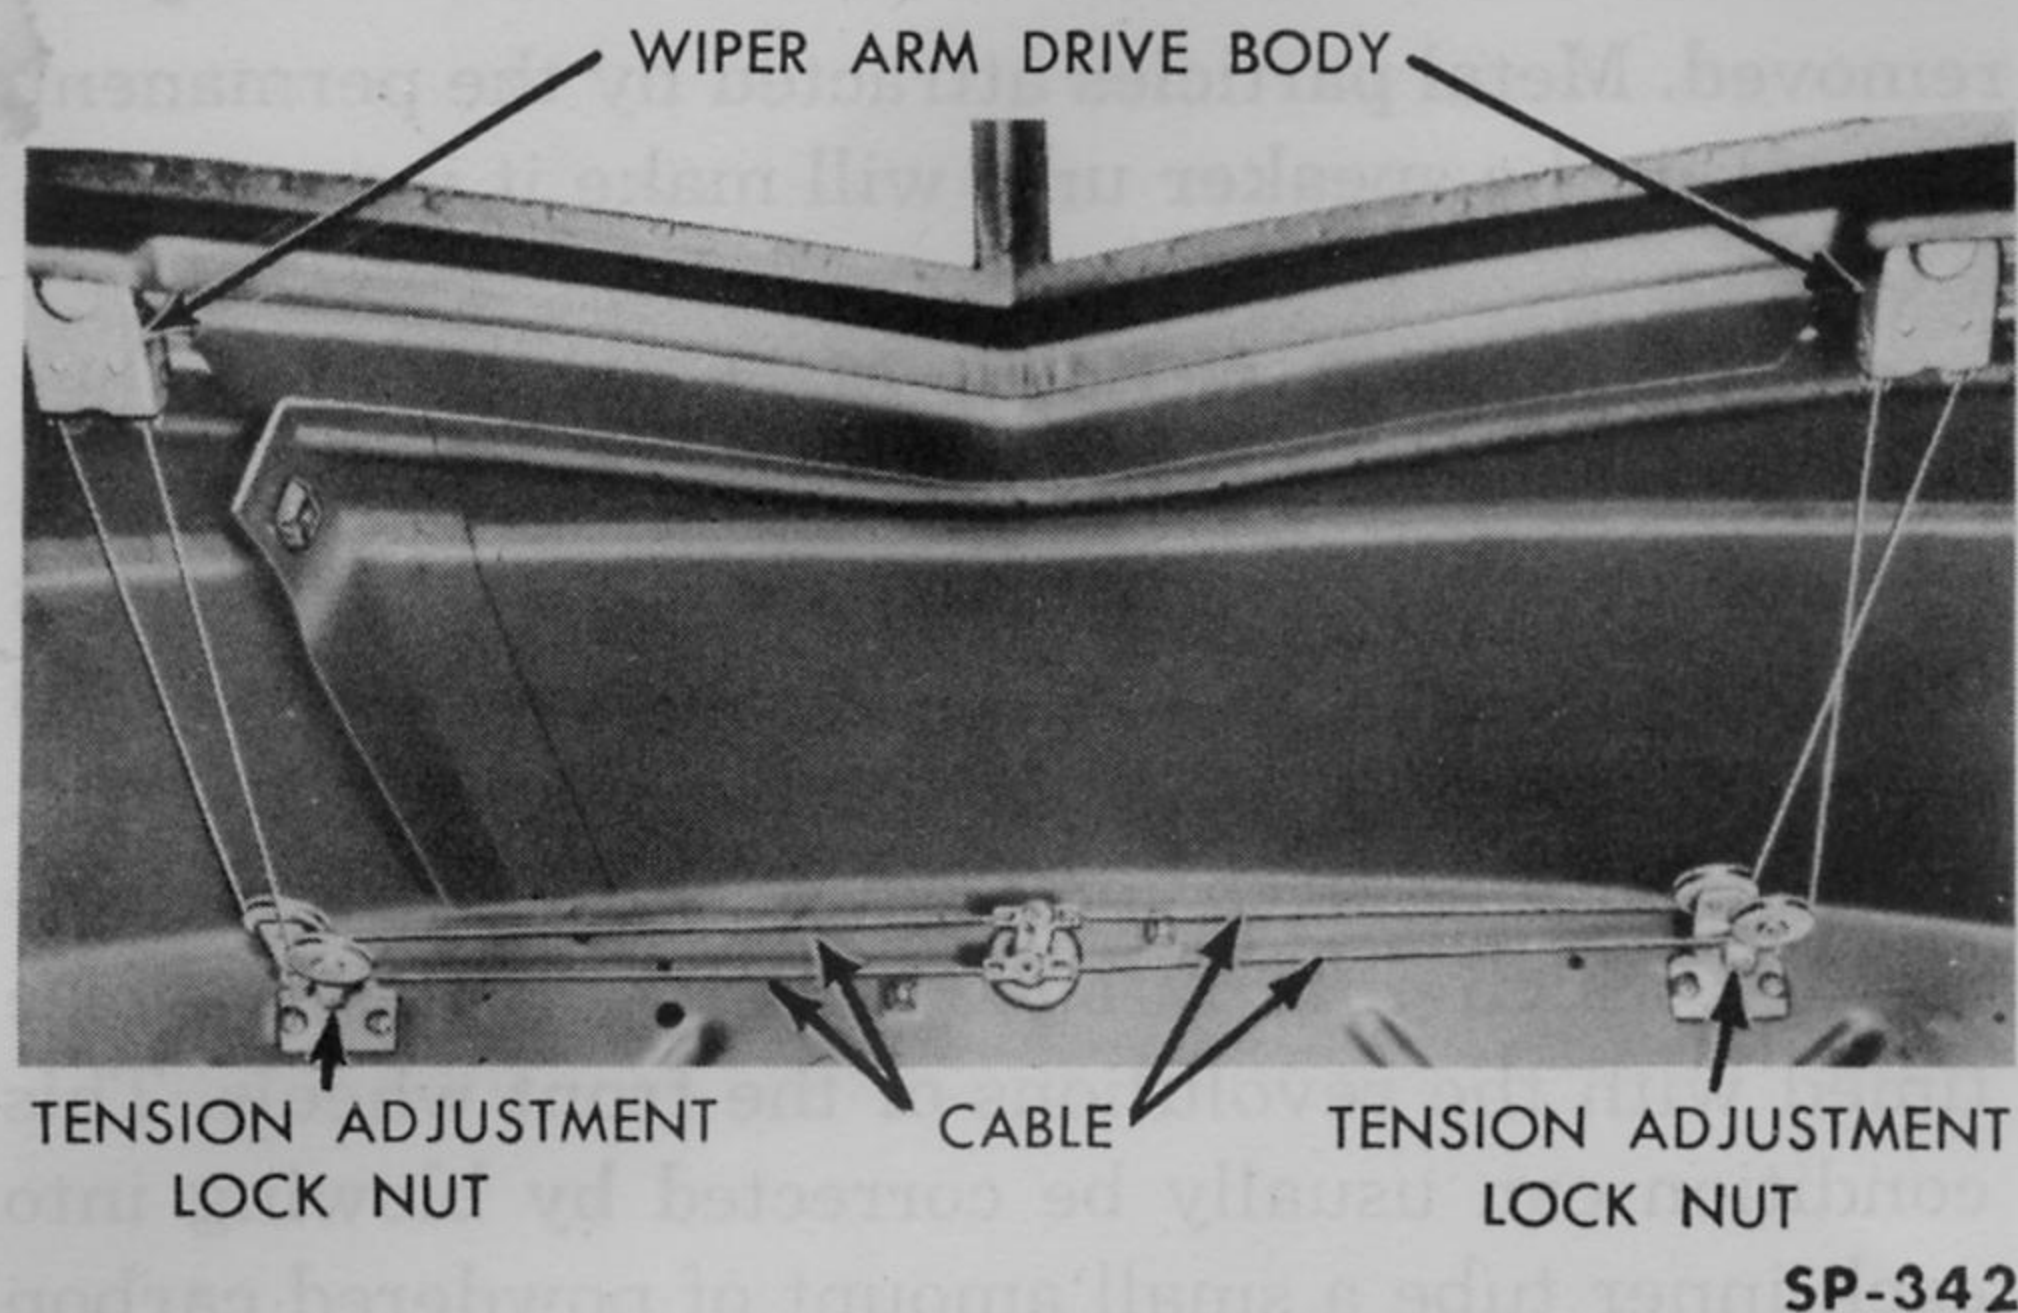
Frazer Vacuum Windshield Wiper Cable Installation
